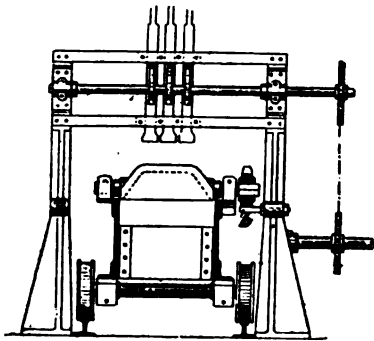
Delivery Point of "Ramsay" Casting Machine.
